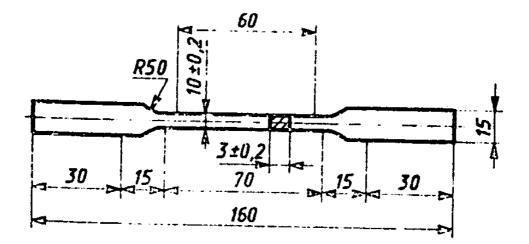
Shape and dimensions of sample of pressure die-casting
